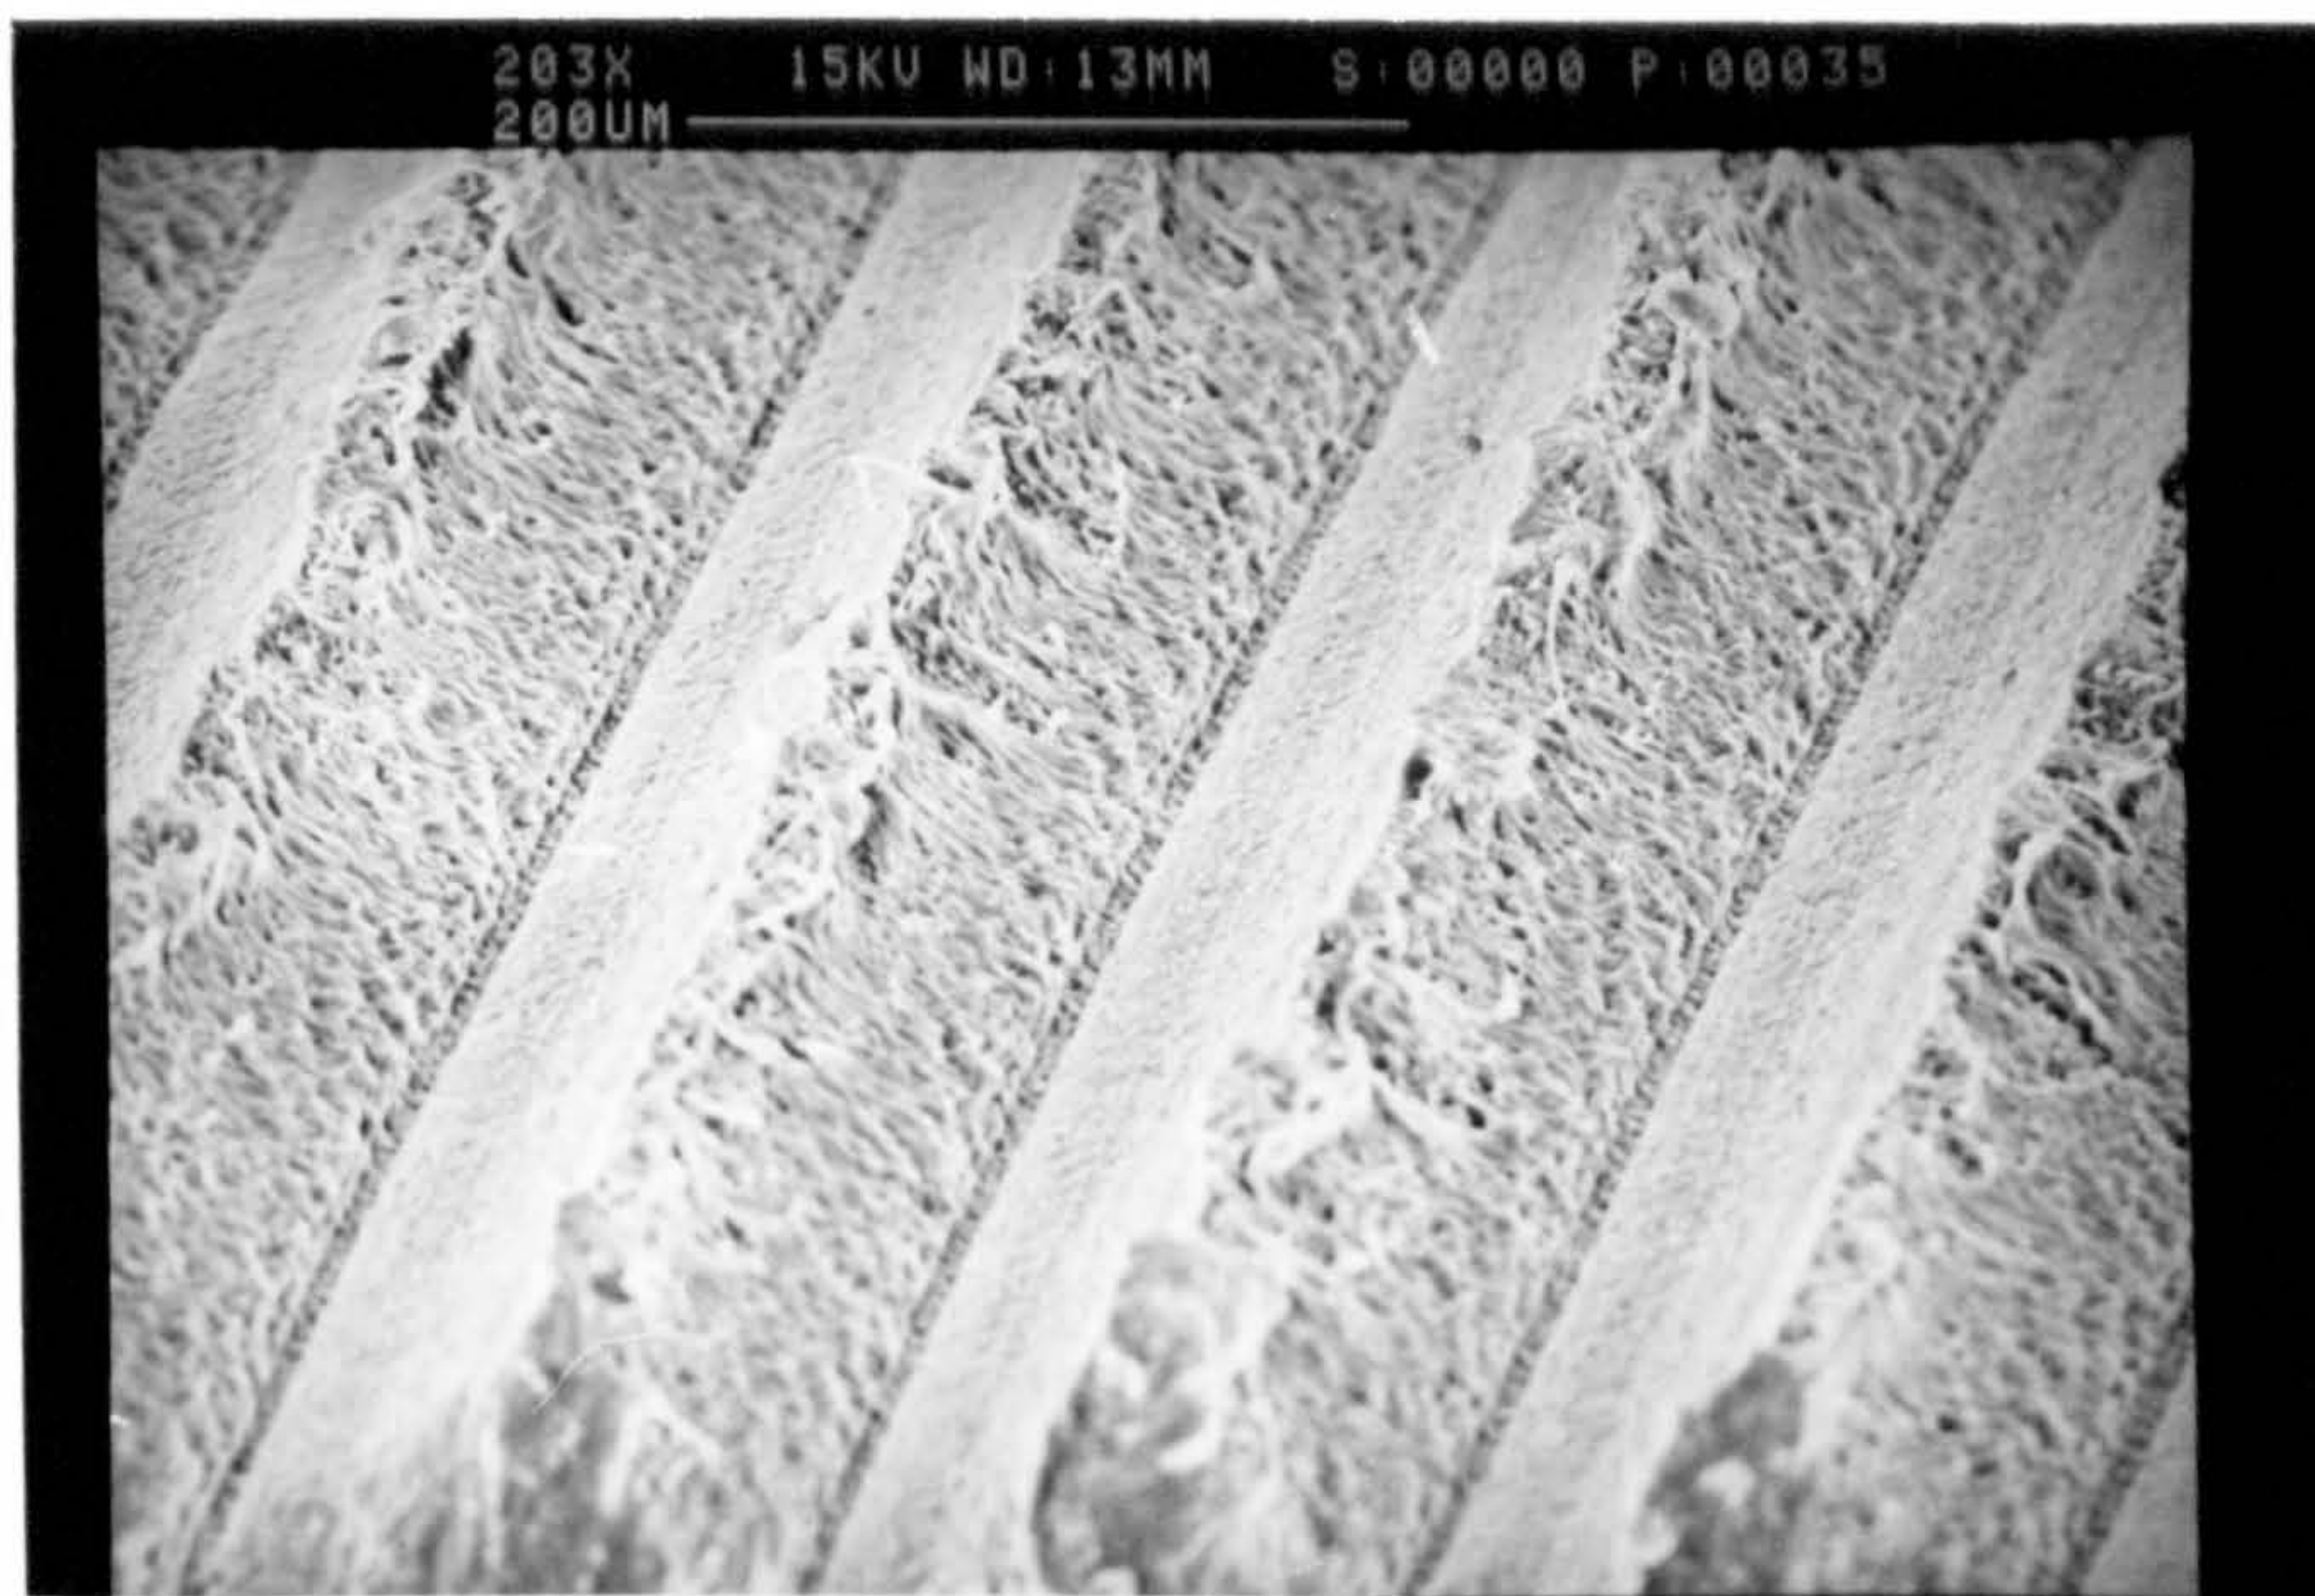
PVC machined surface produced at low cutting speed (25 m/min) suggesting continuous chip formation. (Rake angle =  $30^\circ$ , feed = 0.16 mm/rev)
